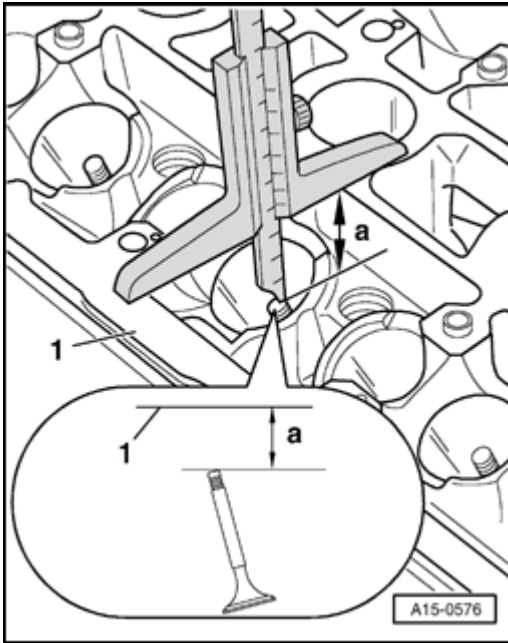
Measuring Distance Between Valve Stem End (Upper Edge) And Top Surface Of Cylinder Head Using Depth Gauge
